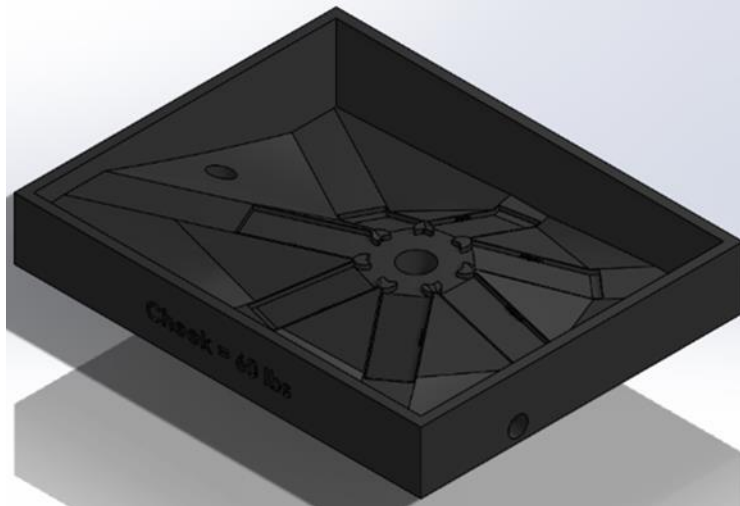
Drawing of Cheek for Fluorescent Penetrant Inspection Testing
